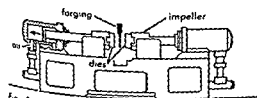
Impactor forging machine. (Chambersburg Engineering Company)
